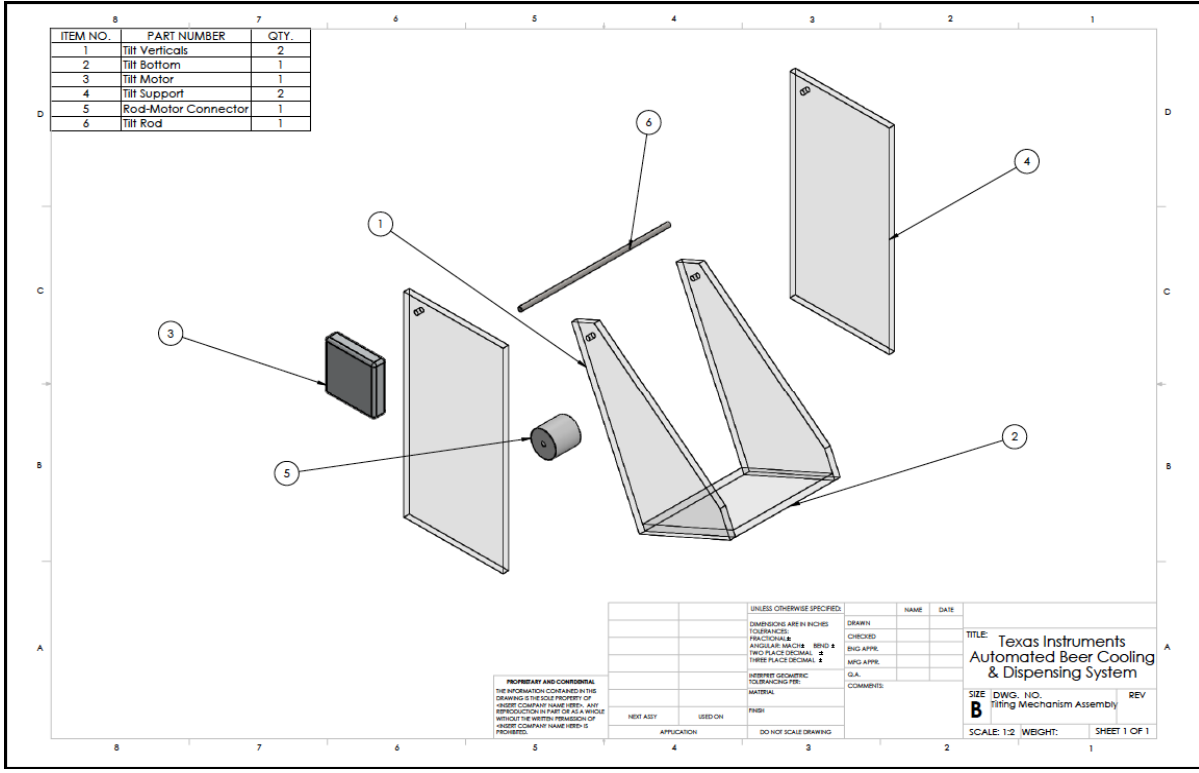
SolidWorks Drawing of Tilting Mechanism Assembly
